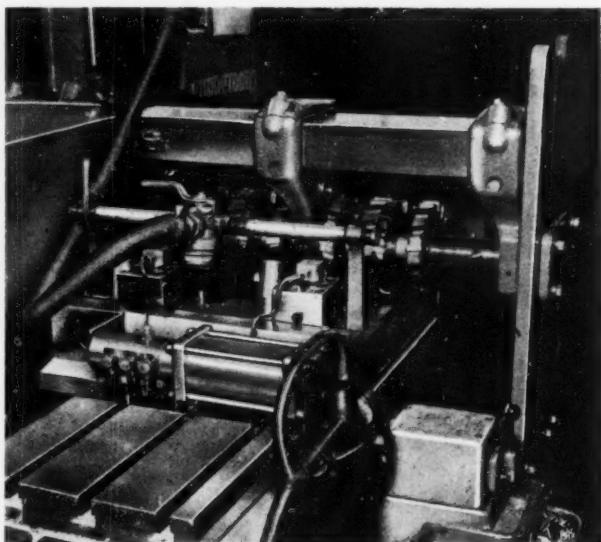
At This Set-up, on a Swedish-built Sundstrand No. 11 Rigidmil, a Gang of Eight Cutters Machines Two Components to the Dimensions Indicated in Fig. 9
